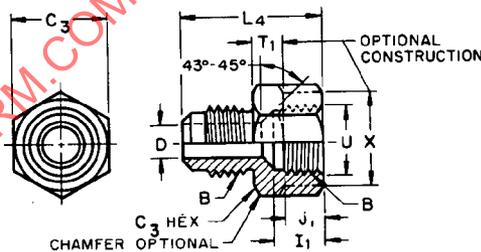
INTERNAL FLARE TO EXTERNAL FLARE ADAPTER
